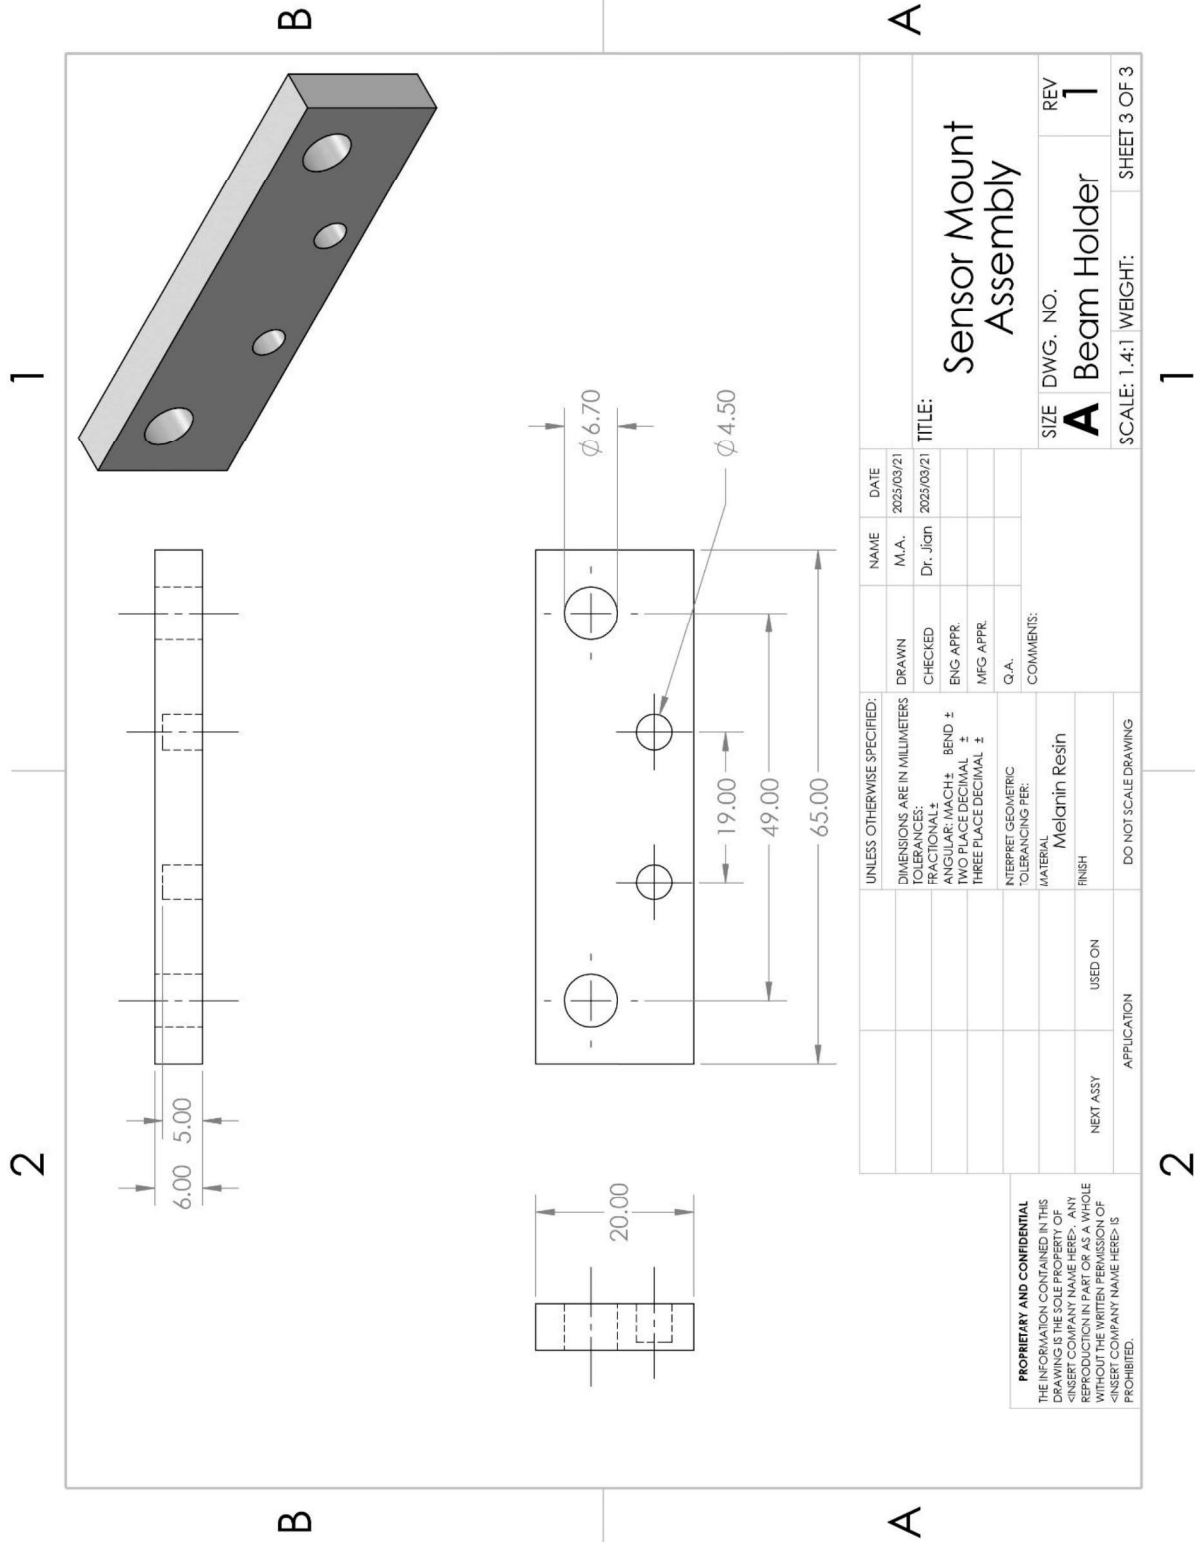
Detailed engineering drawing of 3D printed beam holder.
